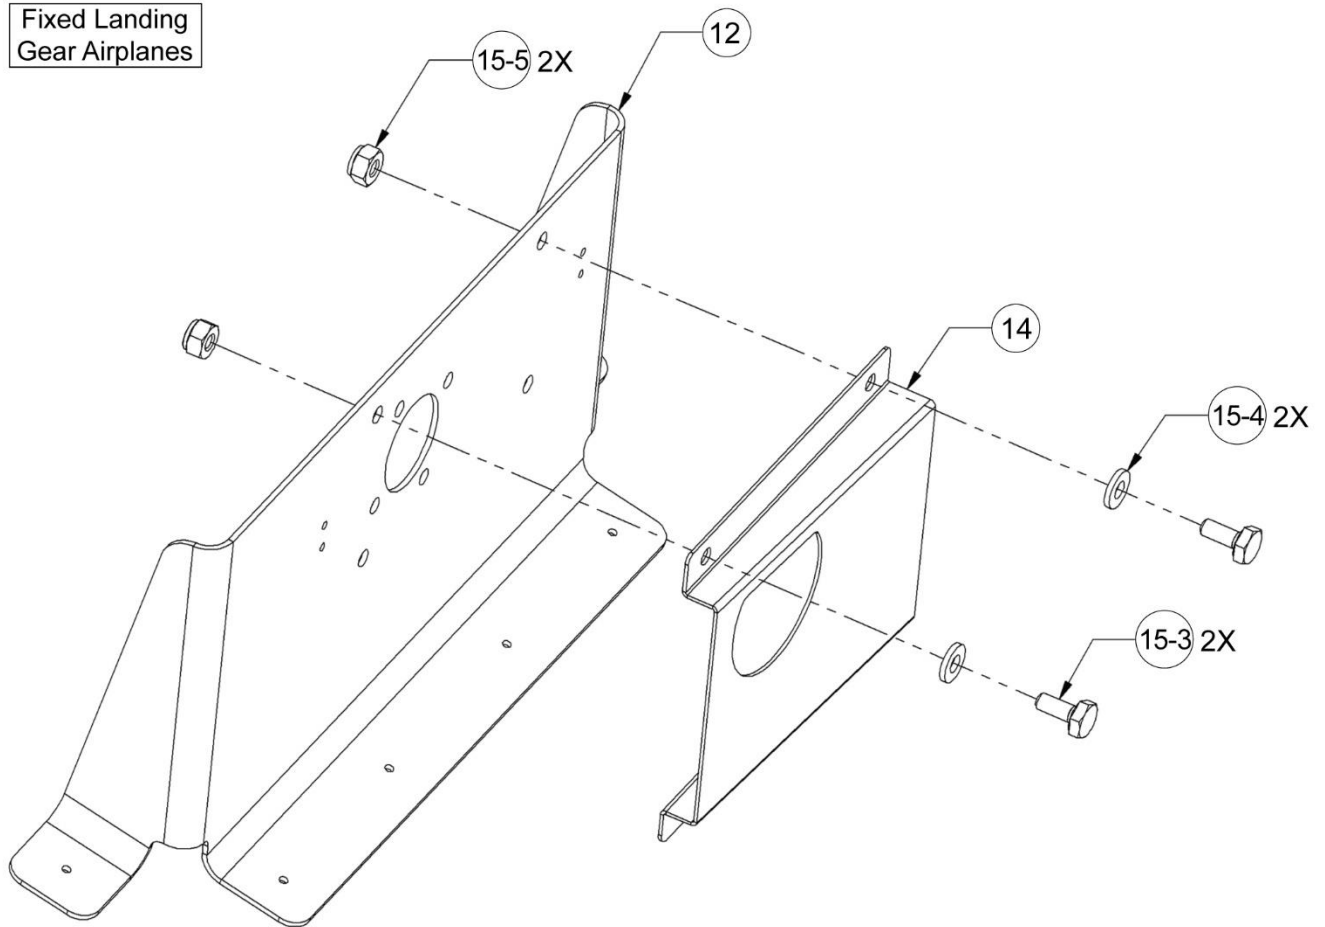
Temporarily Attaching Alignment Fixture to Riser Bracket
